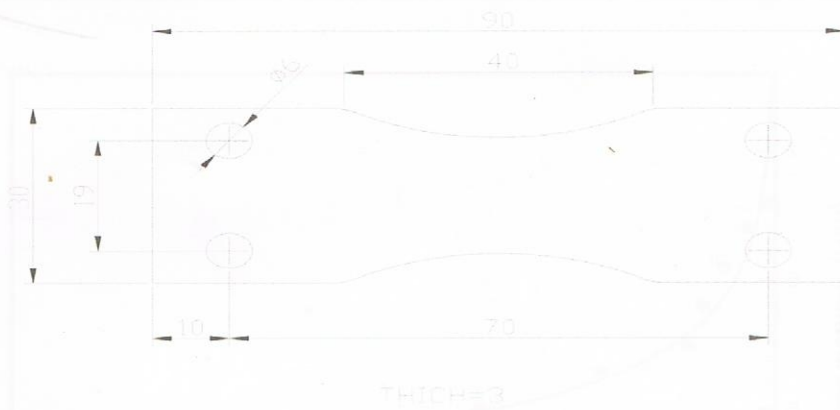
Fatigue specimen geometry (all dimensions in mm).
